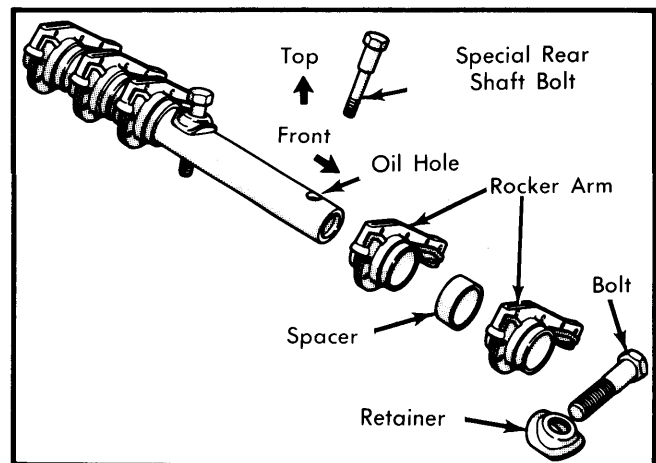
Partially Disassembled View of Rocker Arm Shaft Assembly
